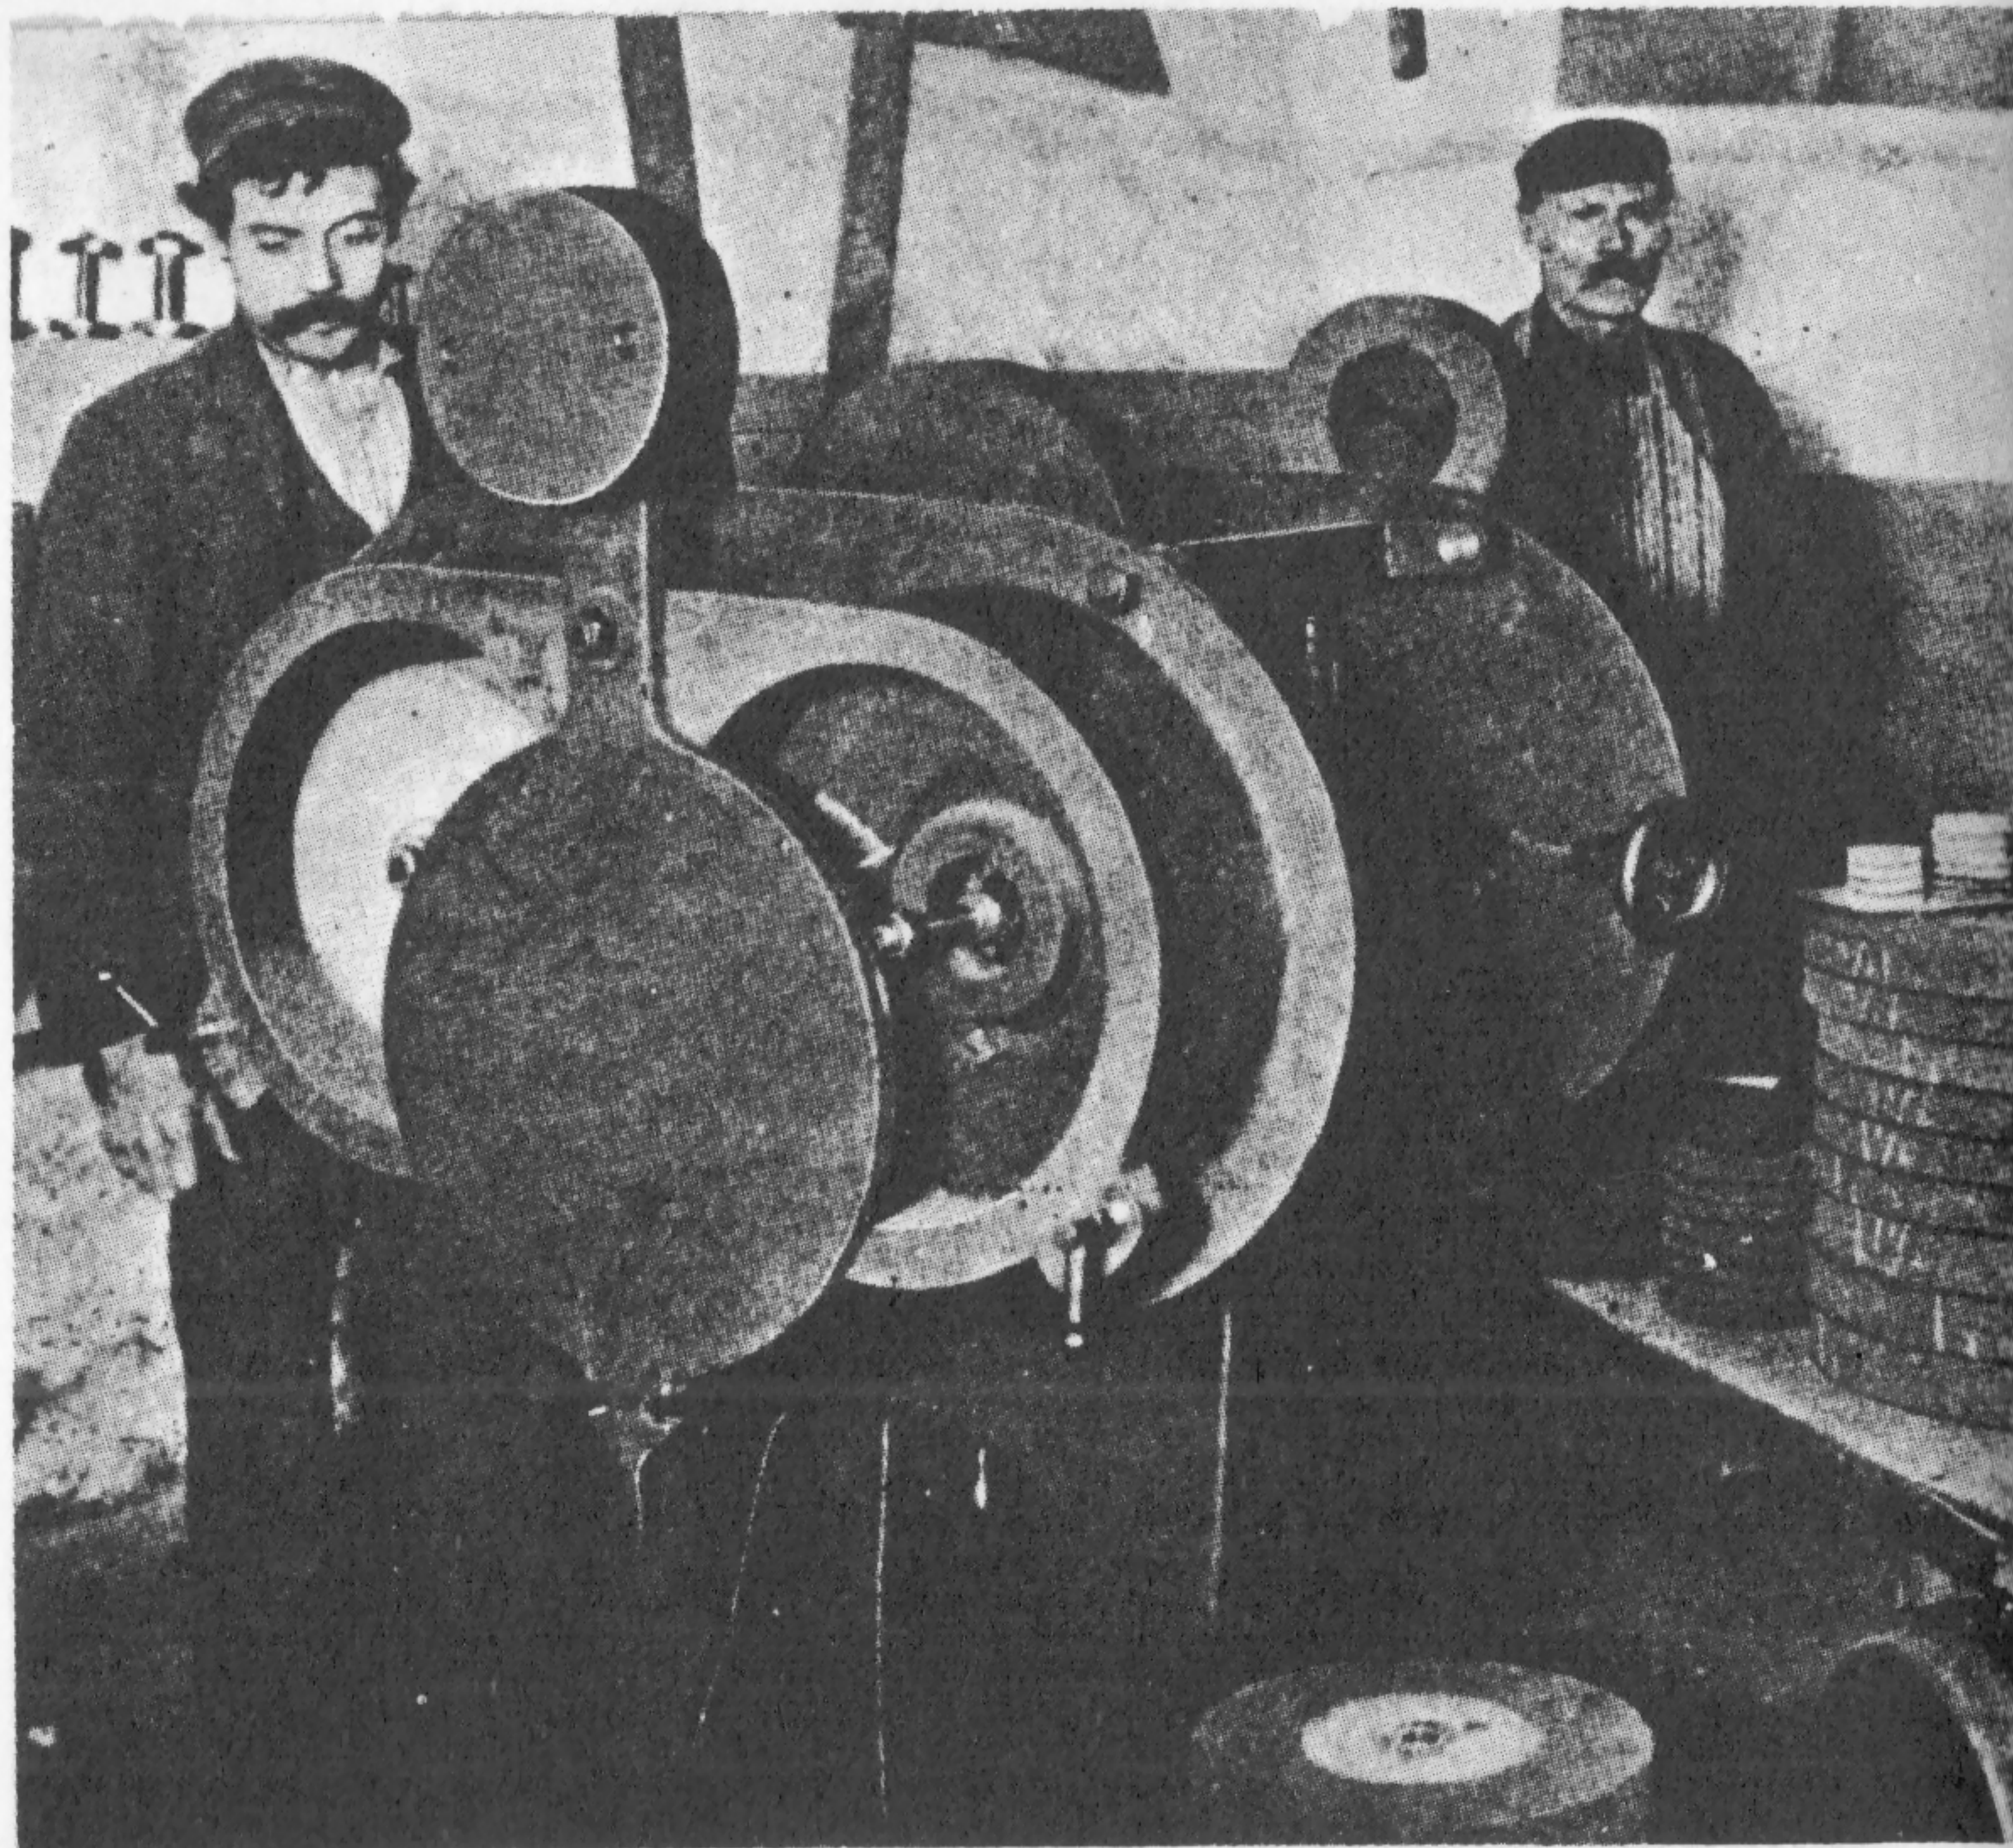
TESTING GRINDING WHEELS, 1900 (Norton Company)
